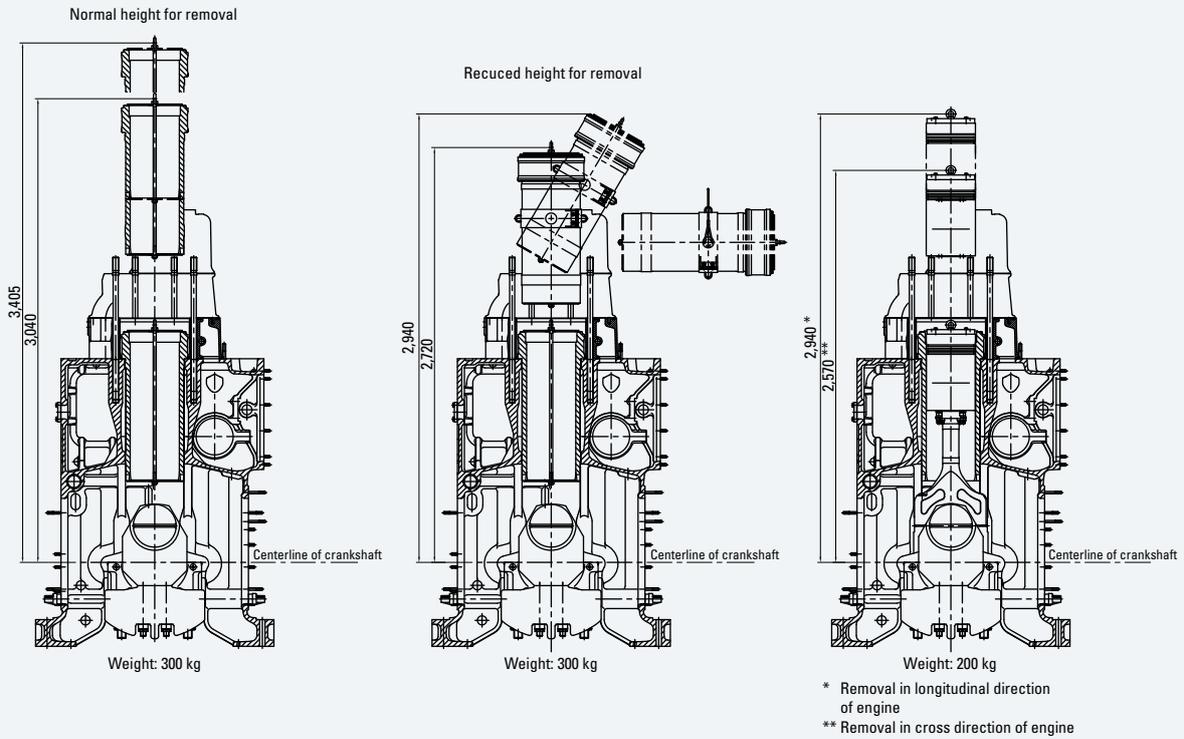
Removal of piston and cylinder liner, dimensions [mm]
